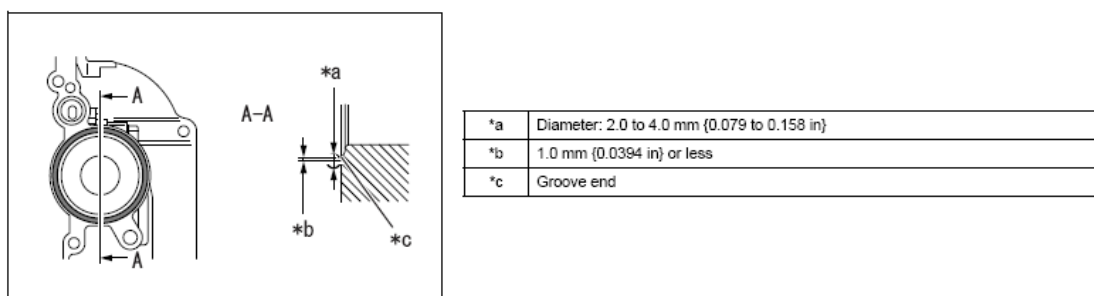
Identifying Three Bond 1217G Application Area On RH Camshaft Housing Sub-Assembly
